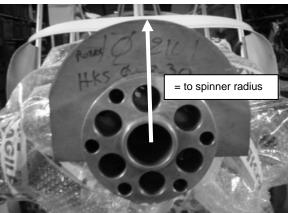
cowling support - horseshoe shaped to fit behind engine drive flange.
